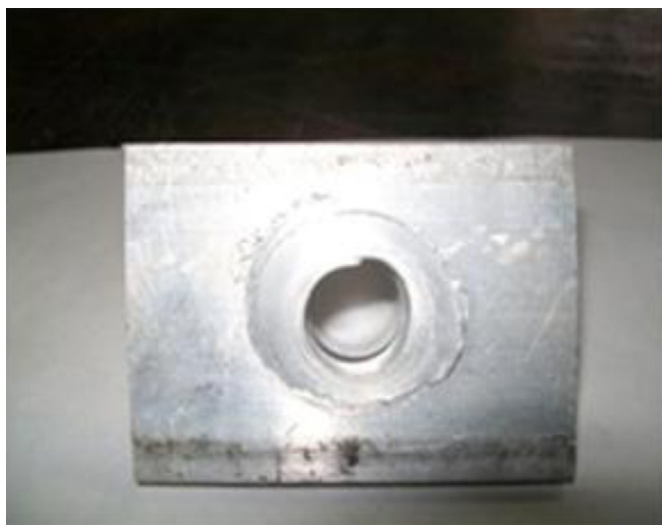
Tube to tube plate weld joints after FWTPET process.
